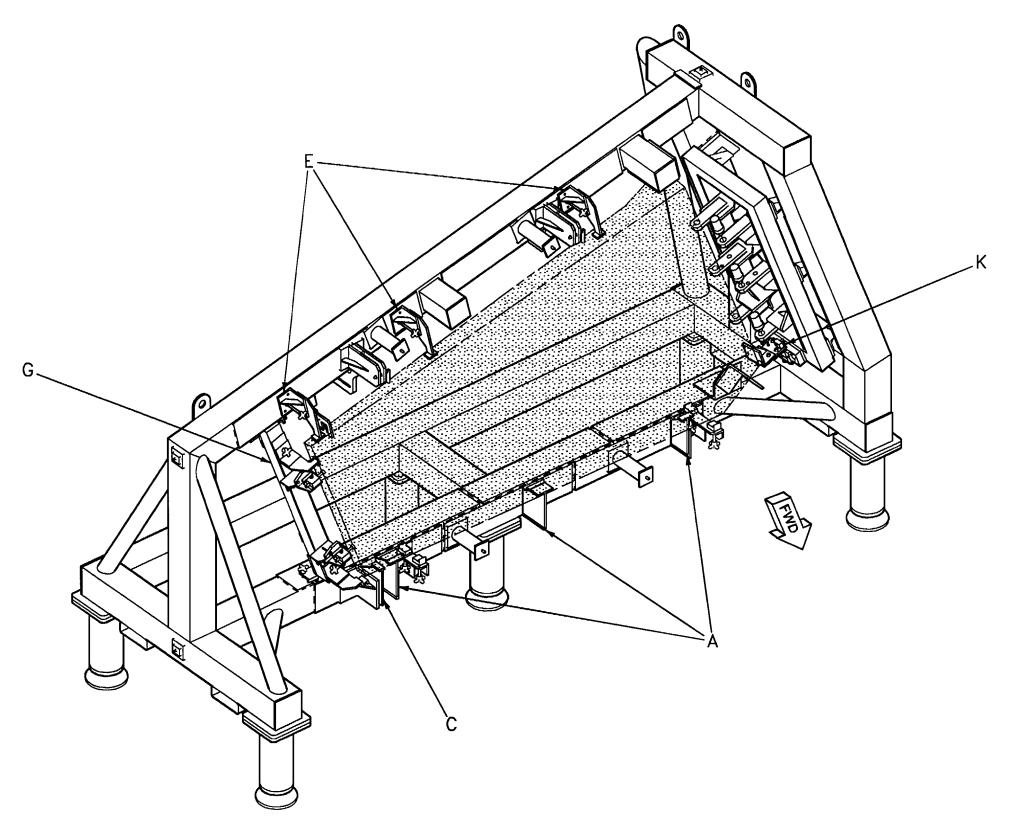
Inspection of Inner Wing Contour (Sheet 1)
